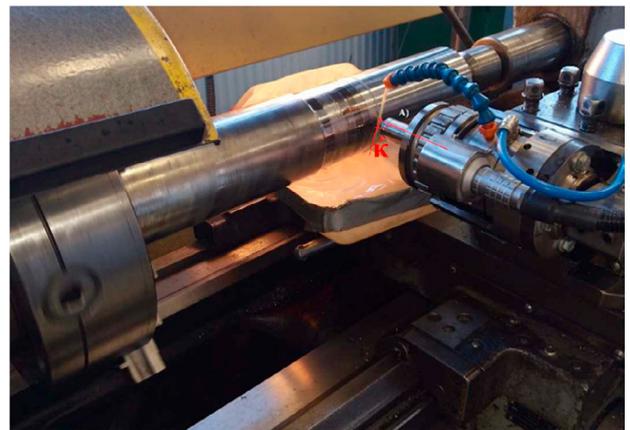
Ultrasonic Burnishing representation of the experimental set-up: a) tool, Tangential Misalignment κ .
